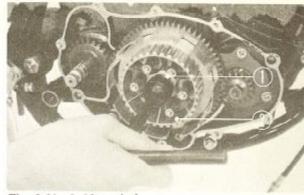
① 16 mm lock nut ② Clutch center
